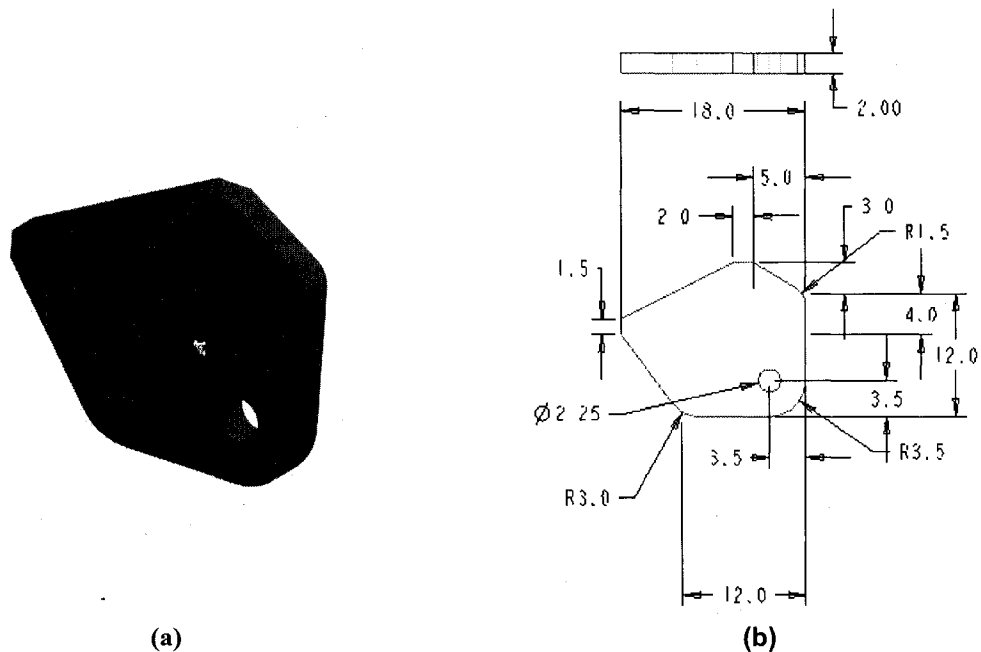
(a) The mooring attachment plate and (b) its dimensions in inches.
